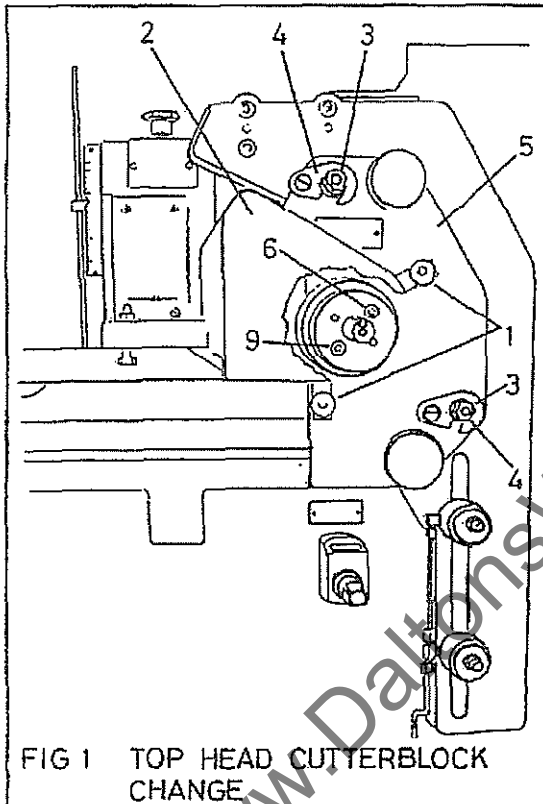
TOP HEAD CUTTERBLOCK CHANGE
